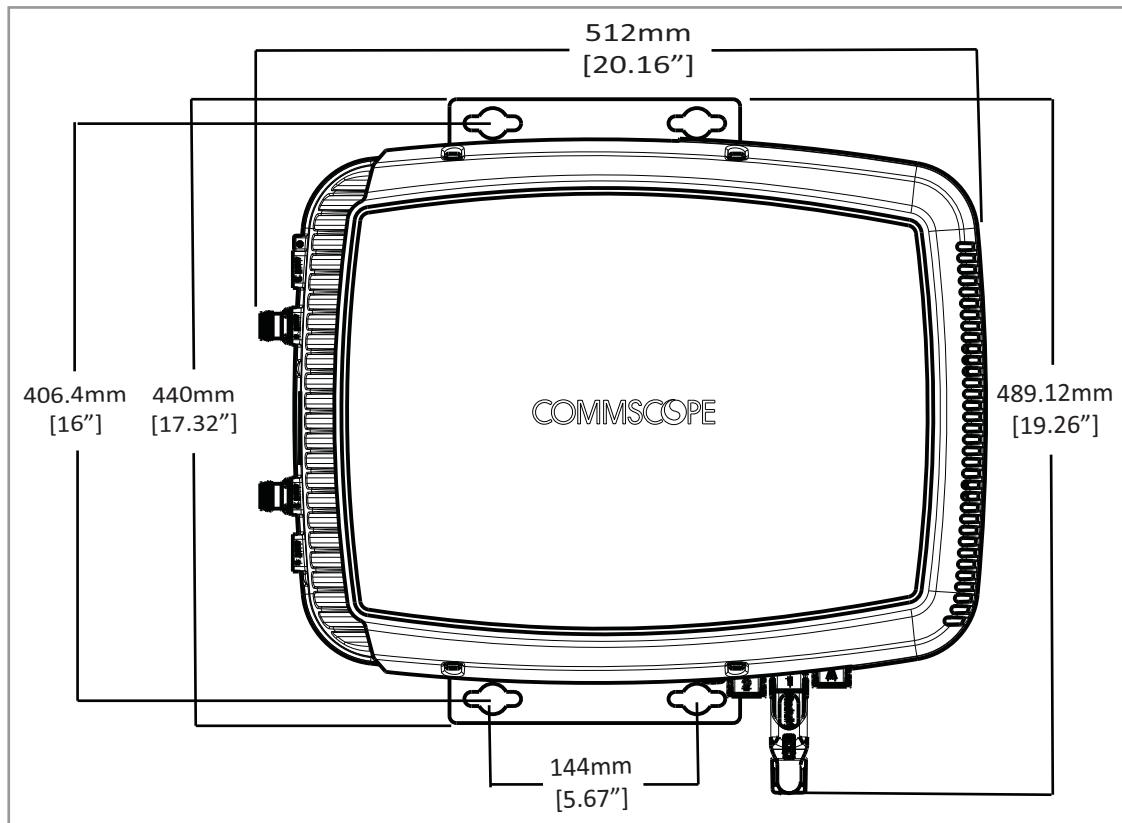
Mounting Dimensions for a CAP L with the Flat Mounting Bracket Kit
